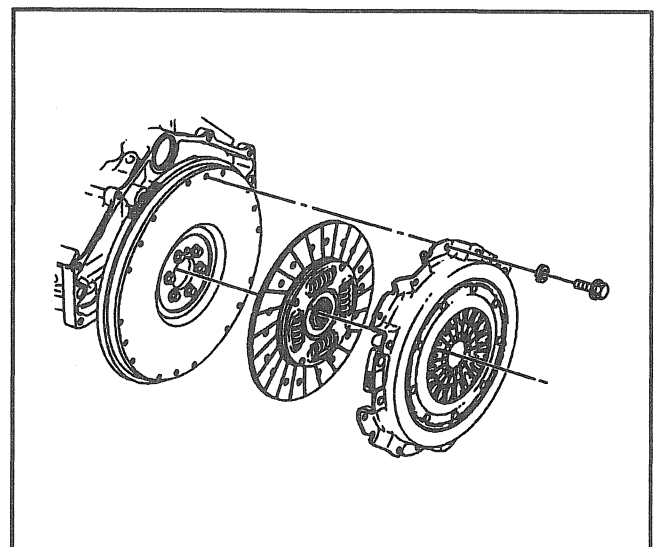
Flywheel, Clutch Plate, and Clutch Cover
